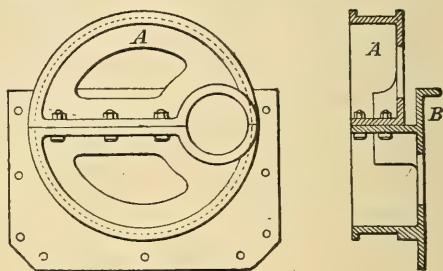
Eccentric Sheave for Paddle Wheel.
